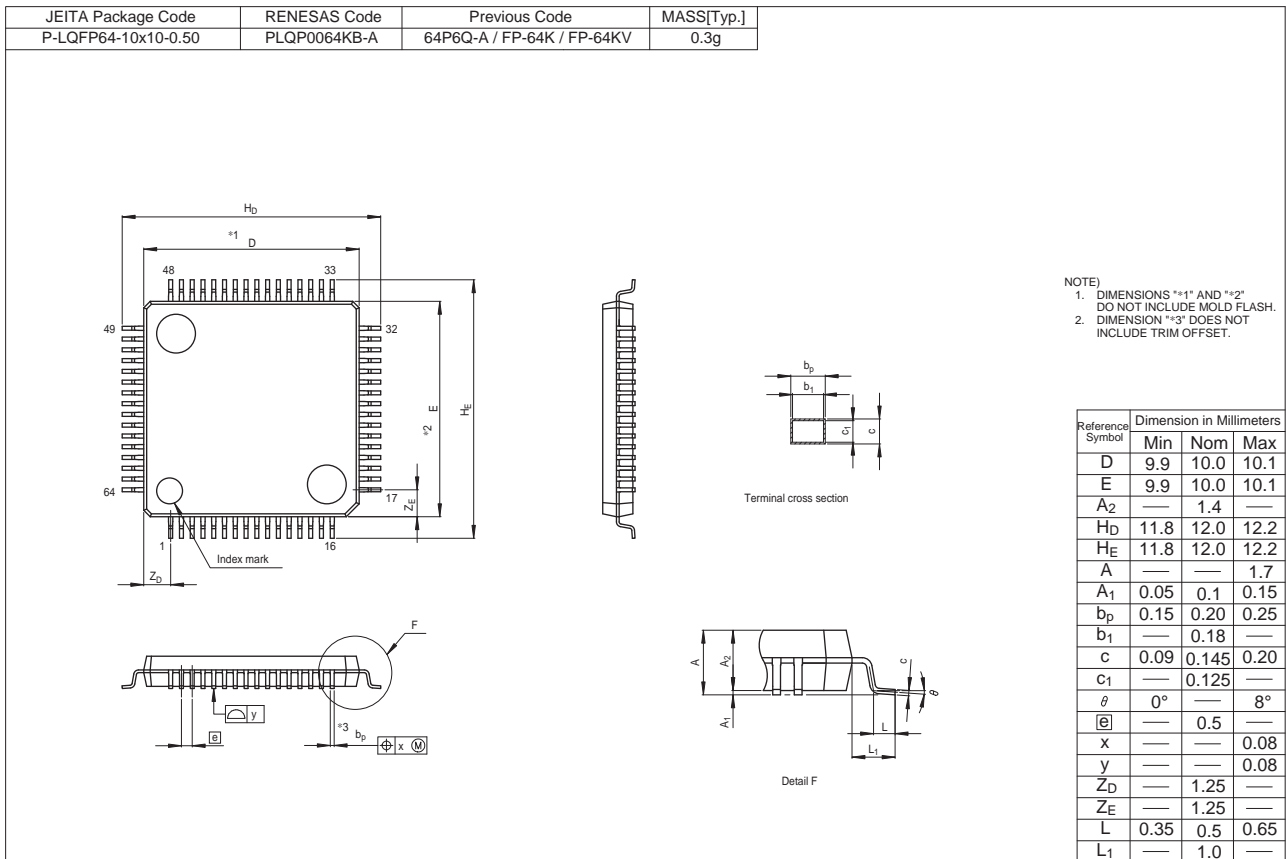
Pin LQFP (PLQP0064KB-A) Package Dimensions
